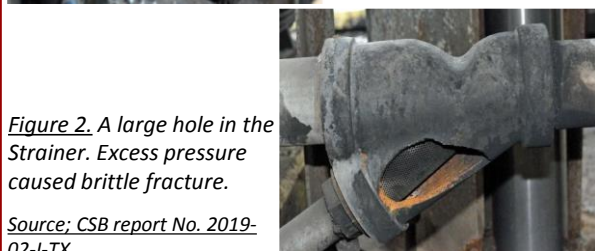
A large hole in the Strainer. Excess pressure caused brittle fracture.
